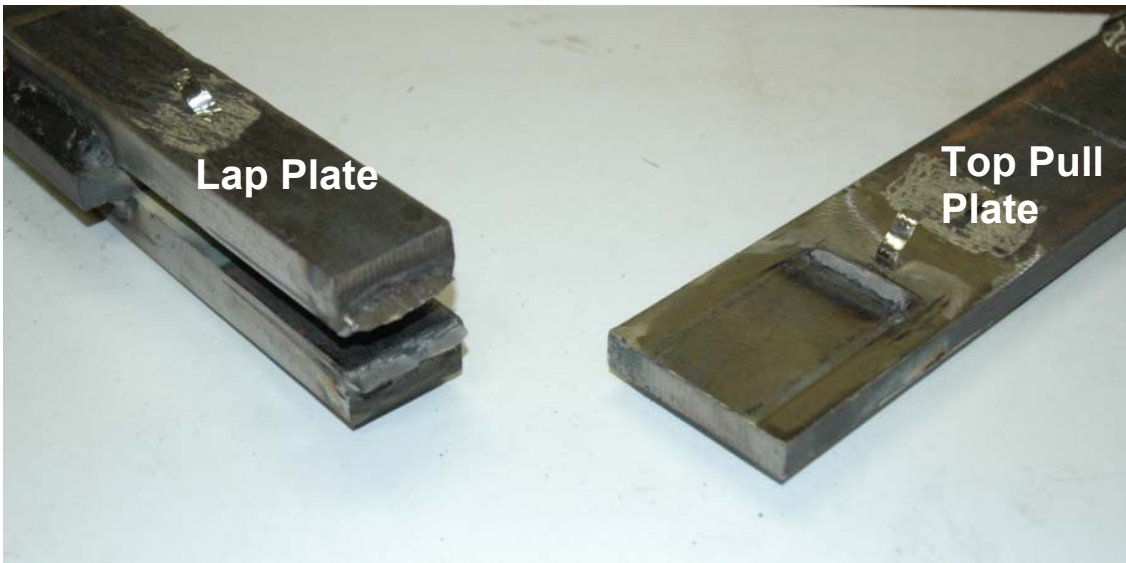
Photograph of Specimen 2 after fracture, where the weld on the lap plate and top base plate is visible
